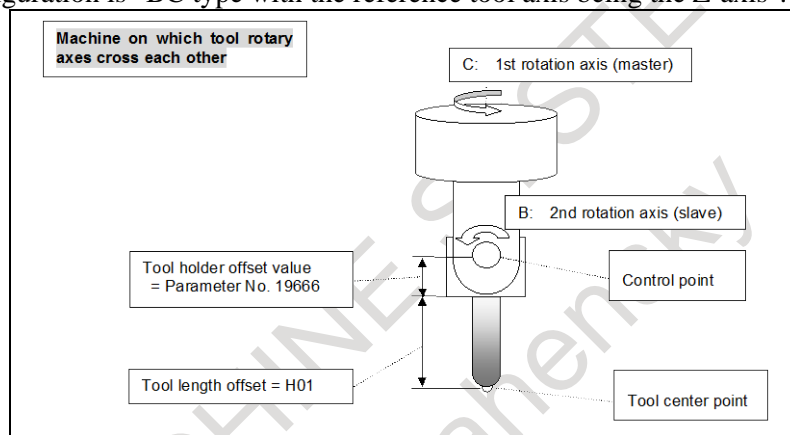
(a) Example of operation on a machine of tool rotation type
